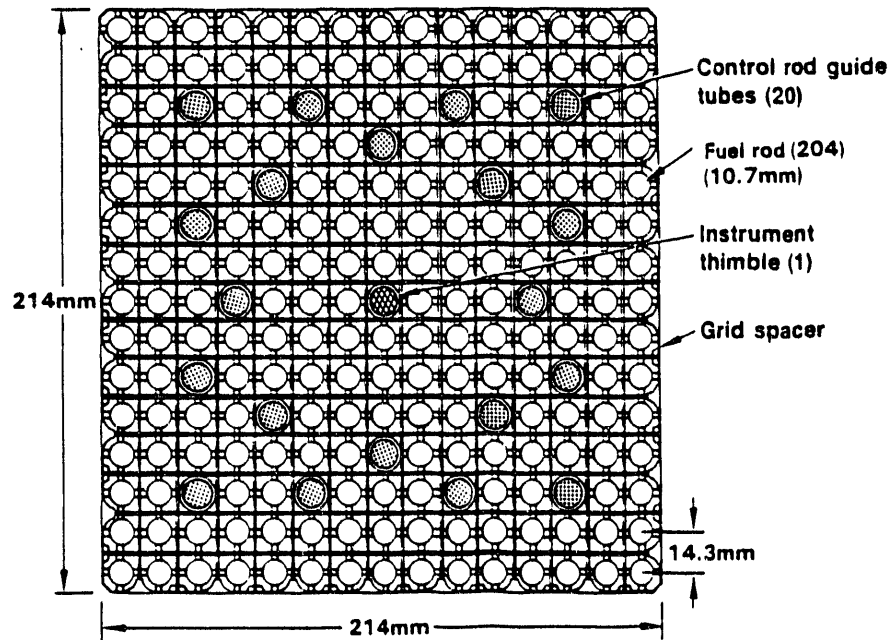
15 x 15 PWR Fuel Assembly Cross Section
